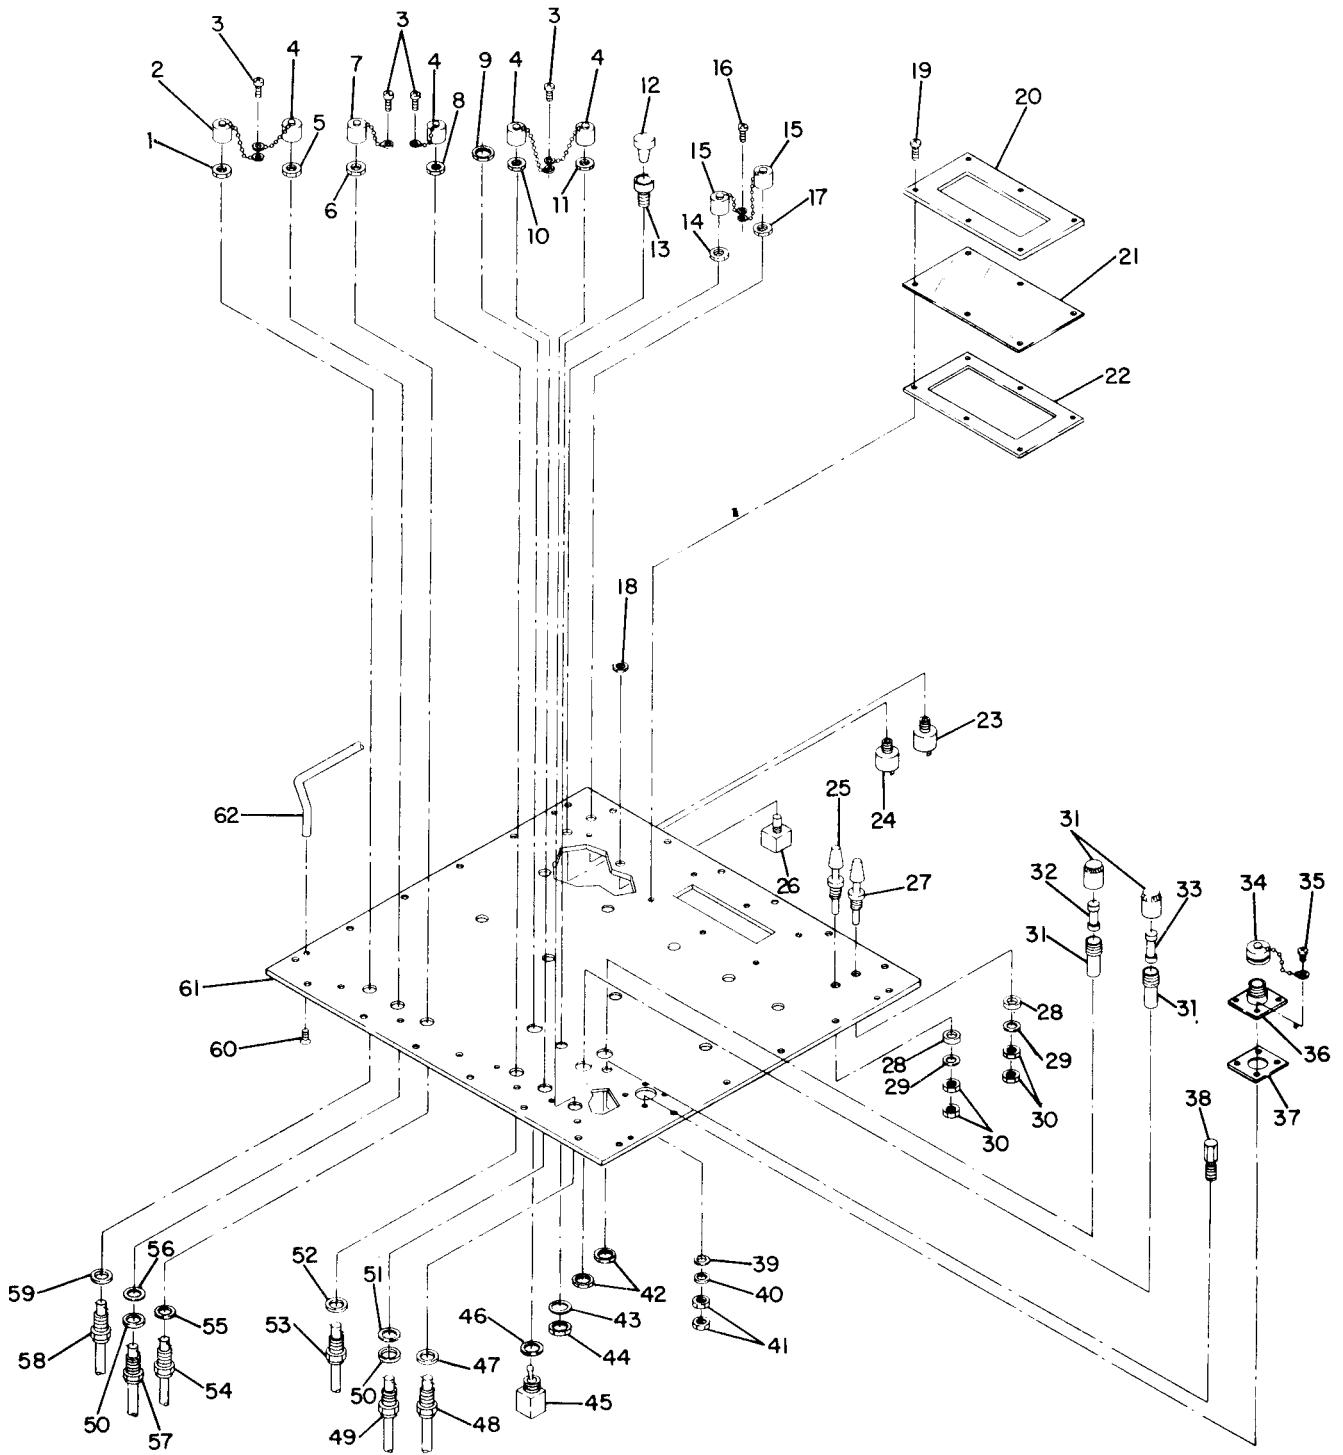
Panel assembly, part number 504-013-001 - exploded view.
